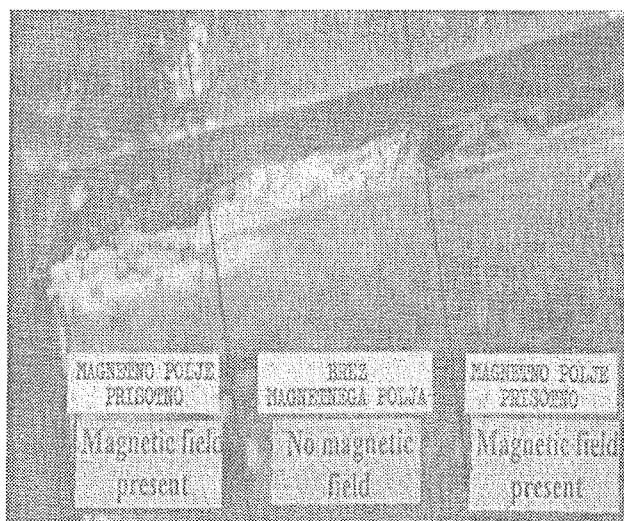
Some alternative variants of electric cable arrangement to demagnetise weld groove, i.e. welded joint.
